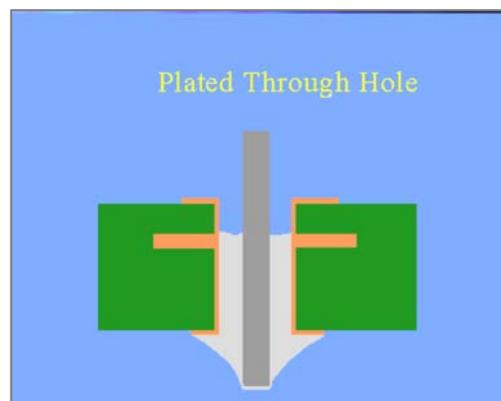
The solder wets the leads but fails to wet the surface of the through hole.
